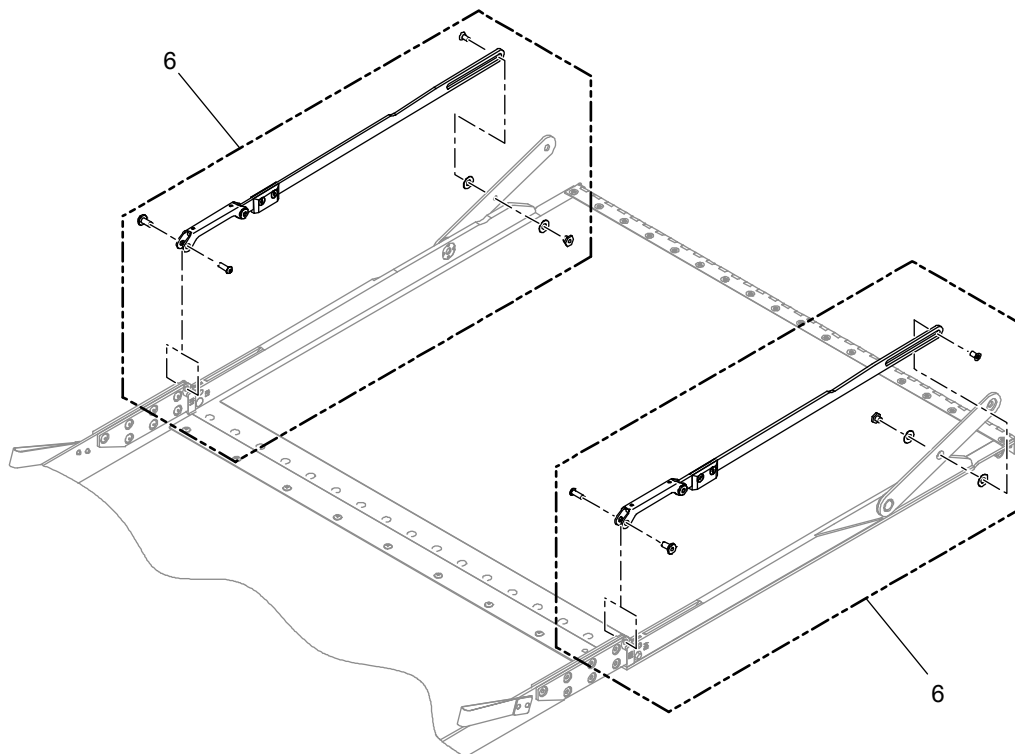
ELECTRIC BIFOLD BR2E RAMP ASSEMBLY (SHEET 1 OF 6)
